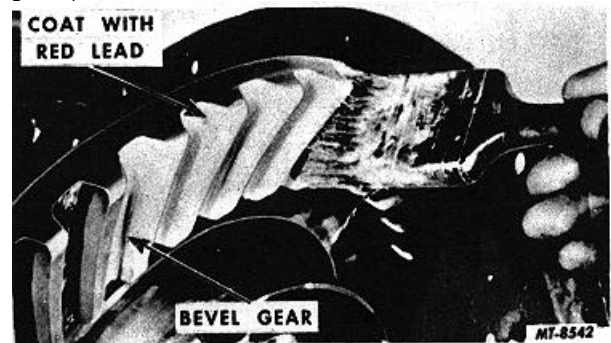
Painting Gear Teeth for Obtaining Tooth Contact Impressions
